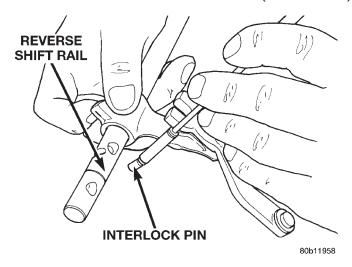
Remove Interlock Pin From Reverse Shift Rail
